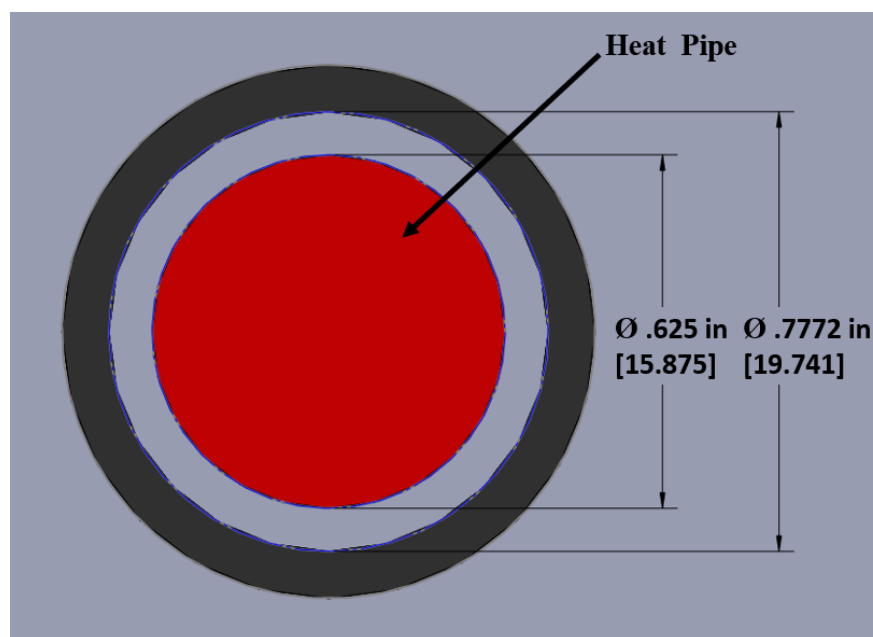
MAGNET Double Tubed Heat Exchanger Single Tube Sizing
